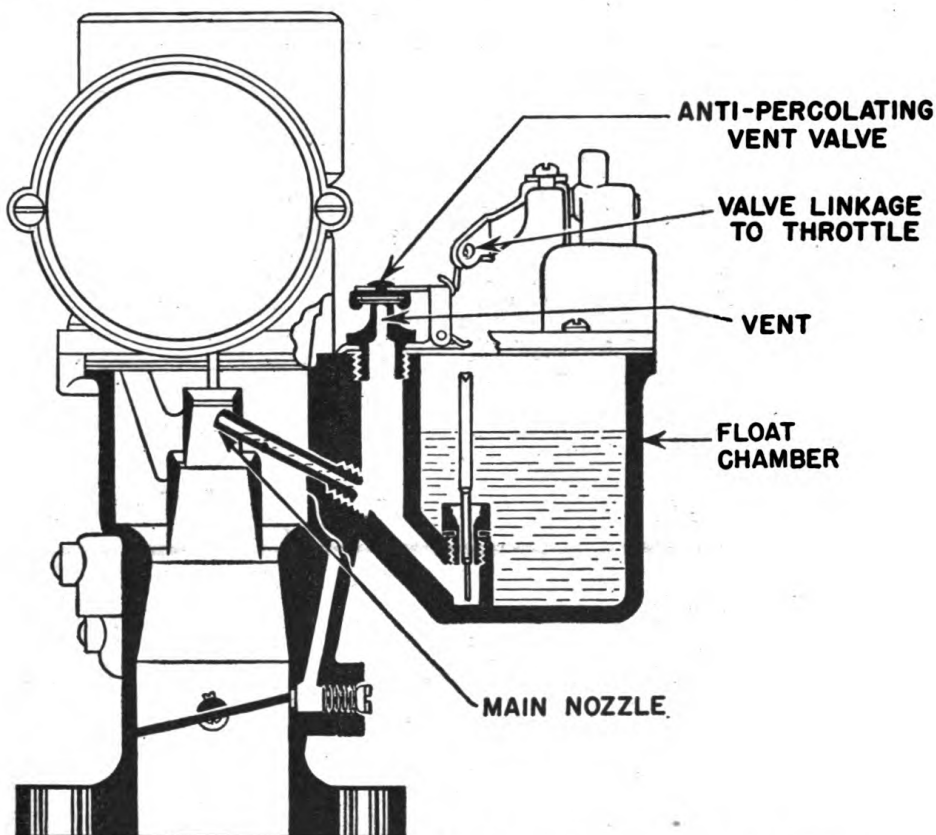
Antipercolating device in a metering rod type carburetor.
